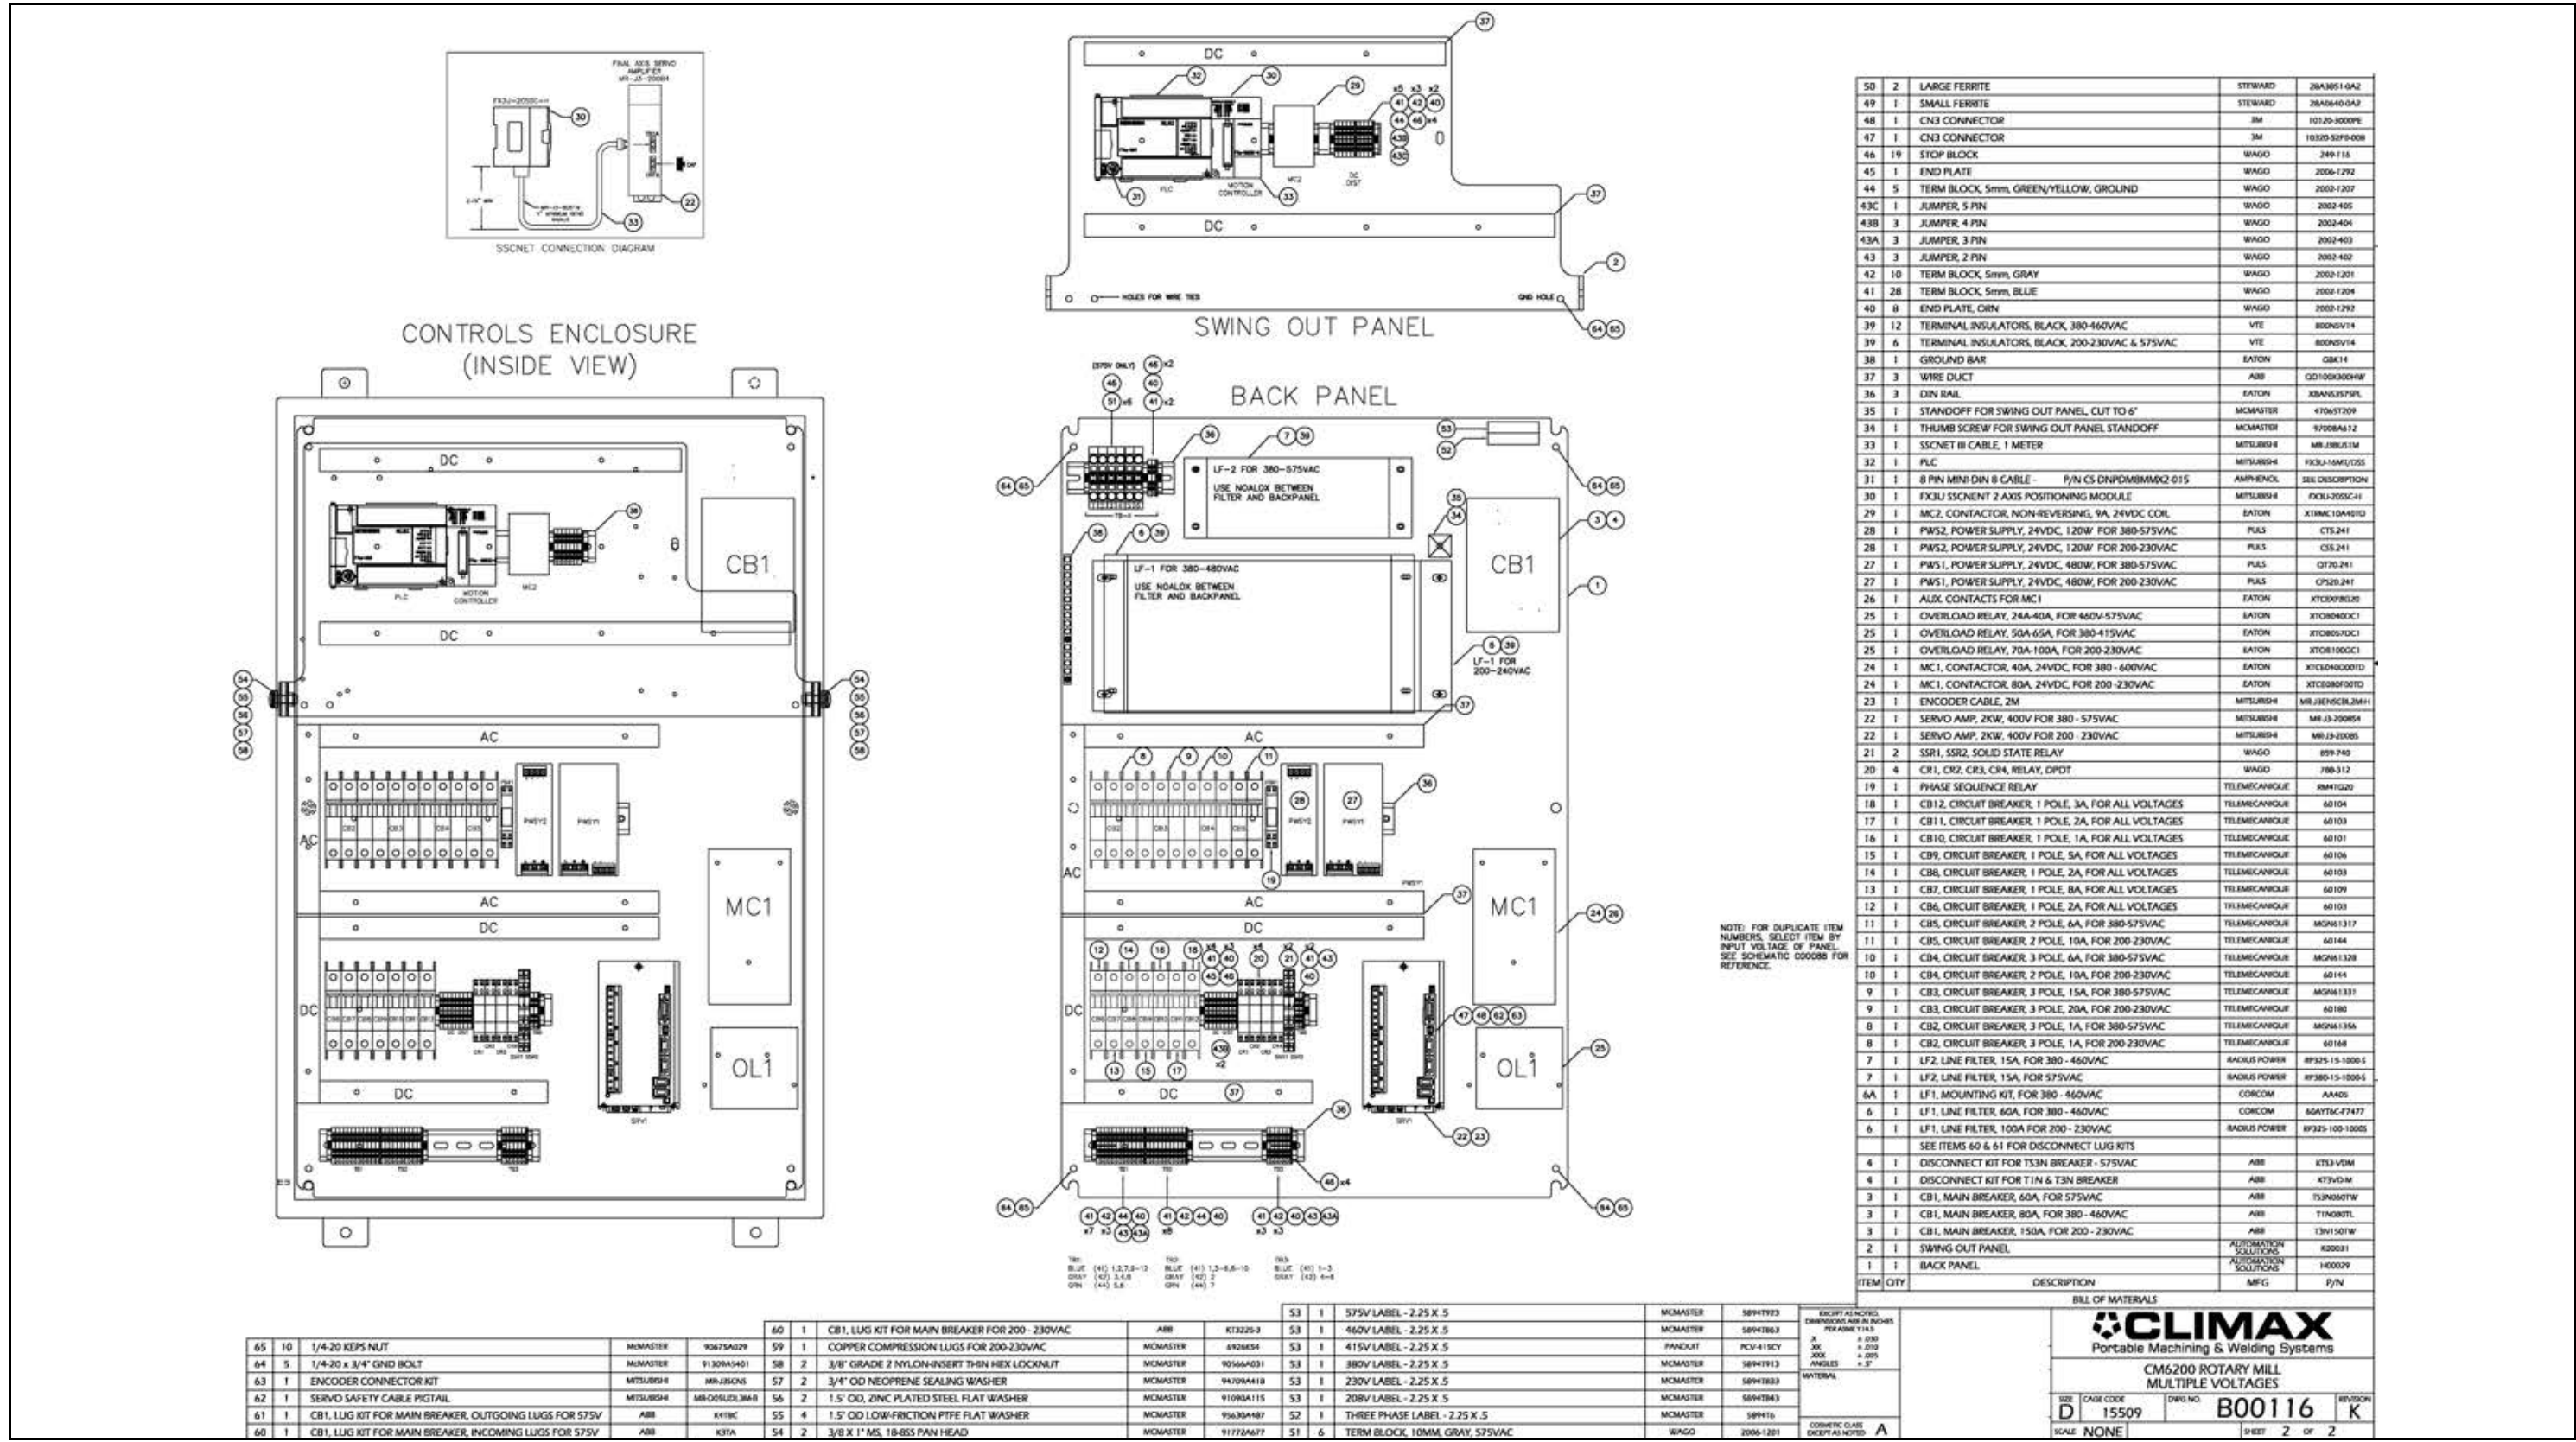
MR-J3 CONTROL PANEL INTERIOR ASSEMBLY SHEET 2 (P/N B00116)
